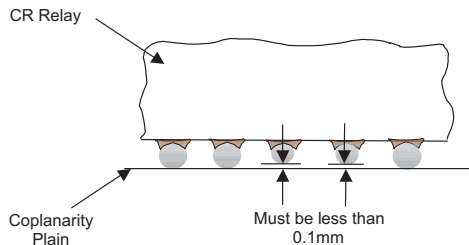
A typical example of the plane set up by the three BGAs most distant from the relay and how the tolerance is set up for the other BGAs. Solder paste on the PCB must be at least 0.1 mm thick to have all BGAs successfully solder.
